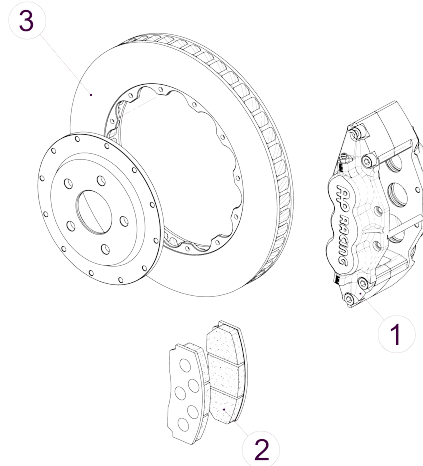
Technical drawing of a racing disc brake: AP Racing *P12102*.
